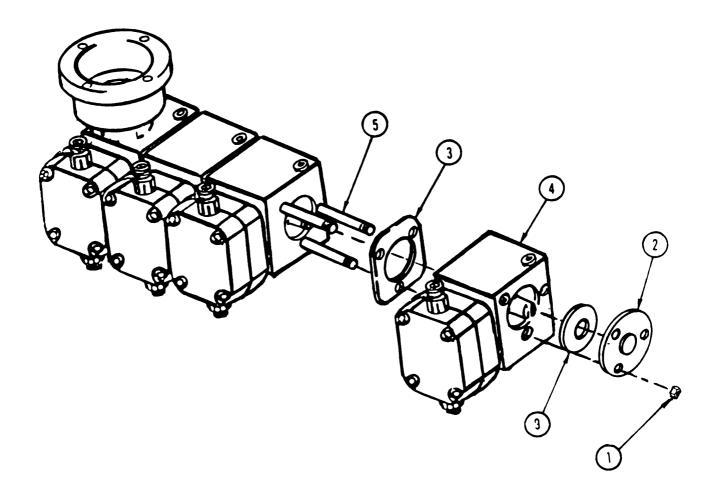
Chemical Feed Pump Block/Head Assembly (USMC)
